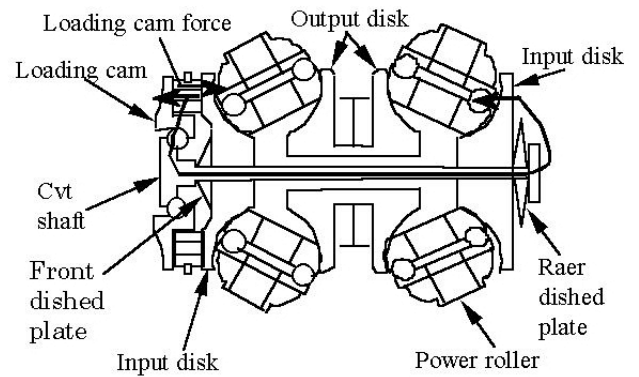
Loading-cam & Front dish plate & Rear dish plate
